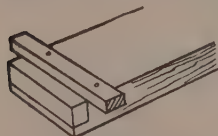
STRIP NAILED TO DRAWER FRONT.
